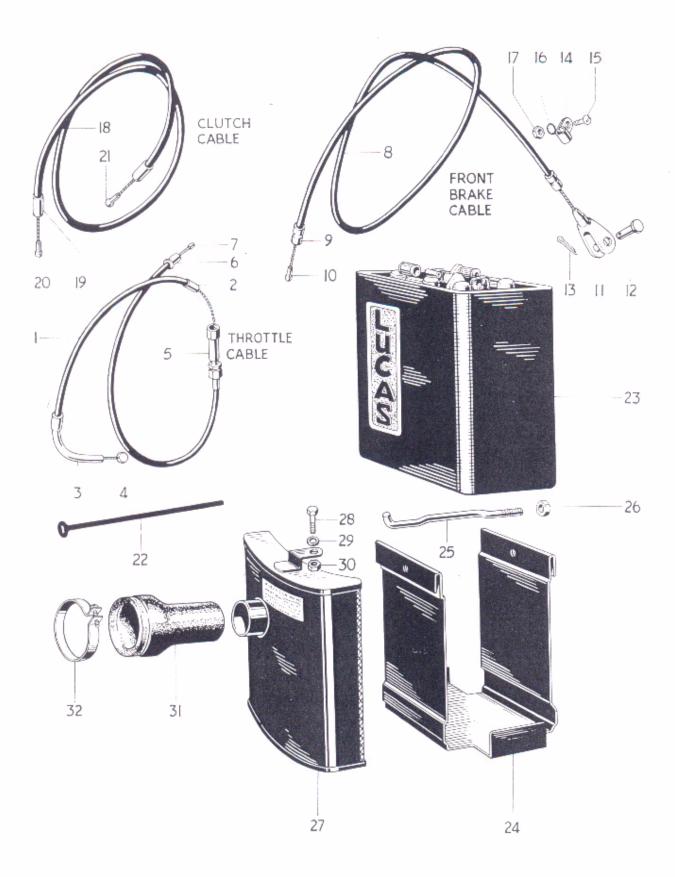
CONTROL CABLES, BATTERY CARRIER AND AIR FILTER.
